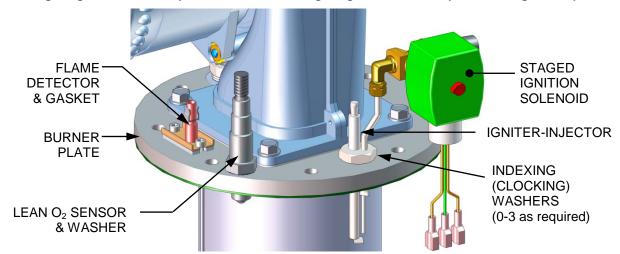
BMK 750/1000 Igniter-Injector & Flame Detector Mounting Details
